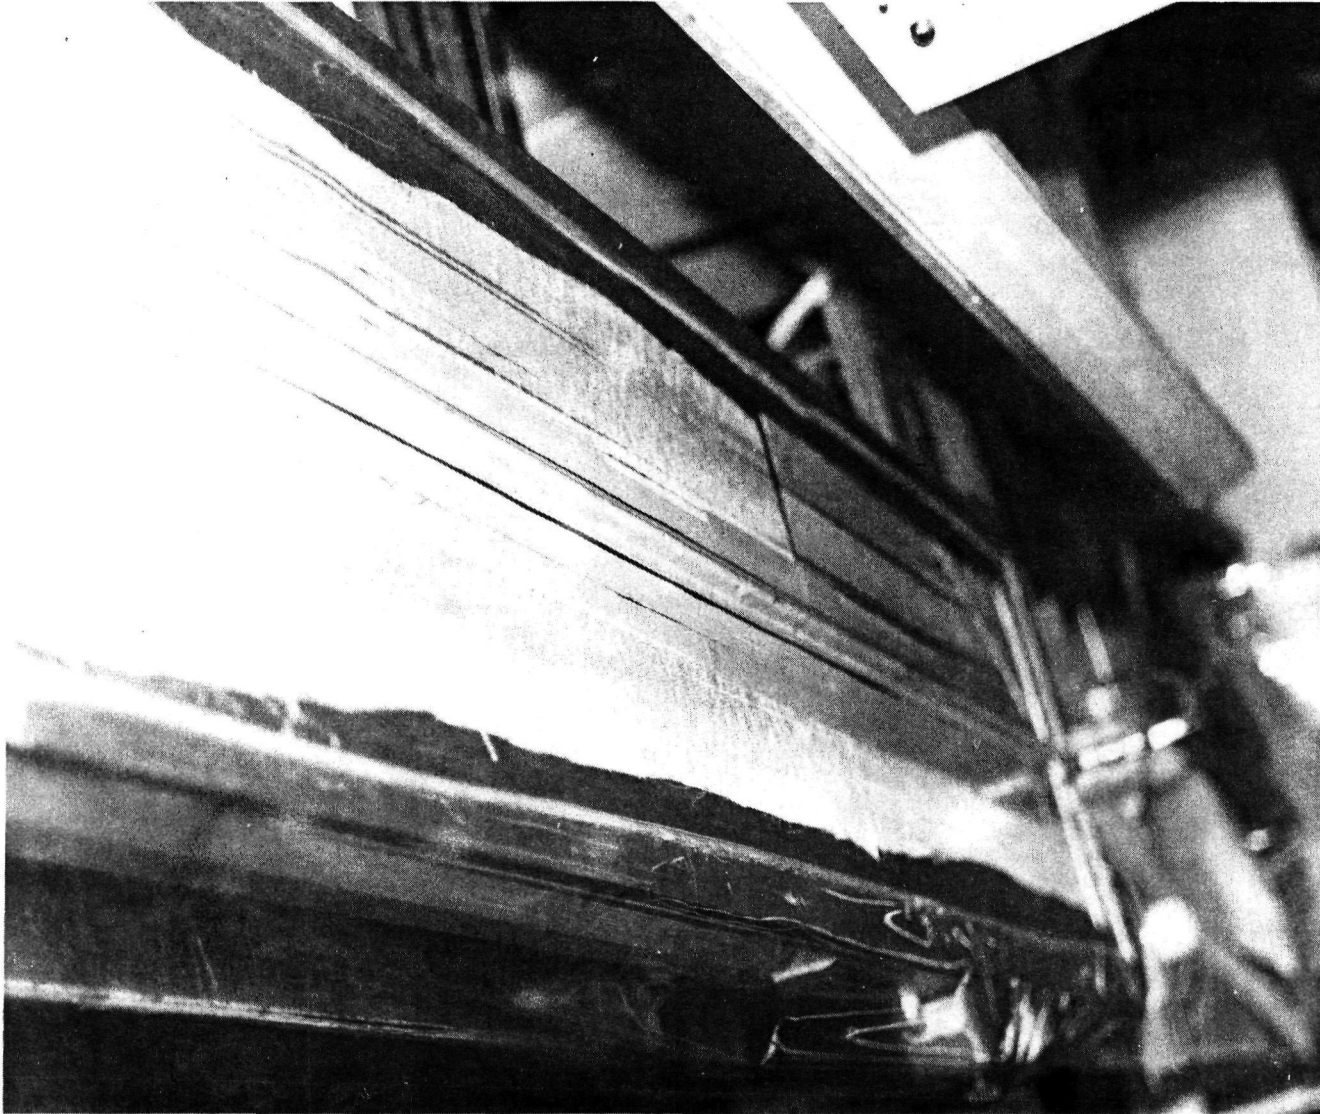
FORMED STRINGER LAYUP/STRINGER FOAM ASSEMBLY UNDER VACUUM ON ELECTRICALLY HEATED TABLE.
